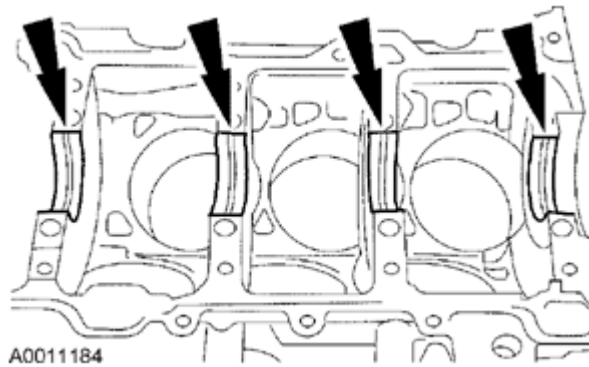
Locating The Crankshaft Main Bearings In Cylinder Block
